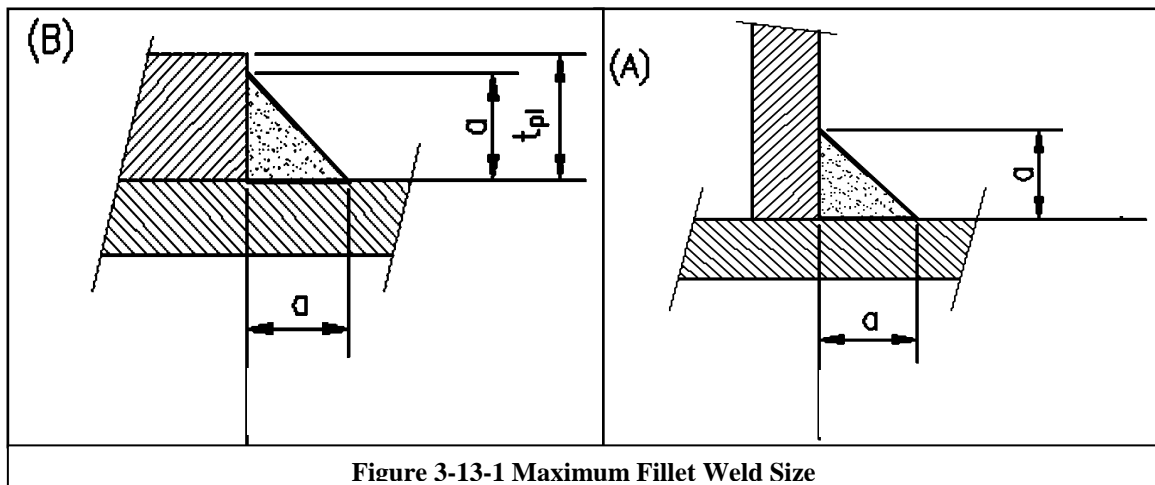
Maximum Fillet Weld Size
